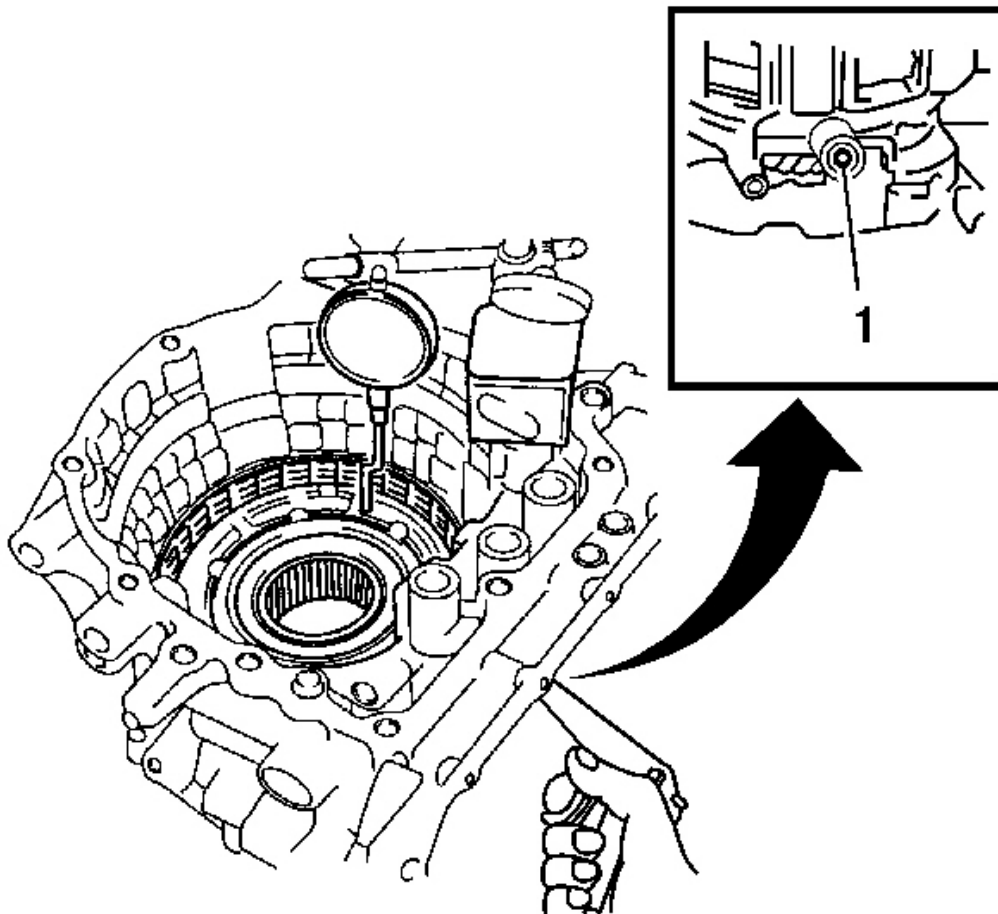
Measuring The 1st & Reverse Brake Piston Stroke Using A Dial Indicator
